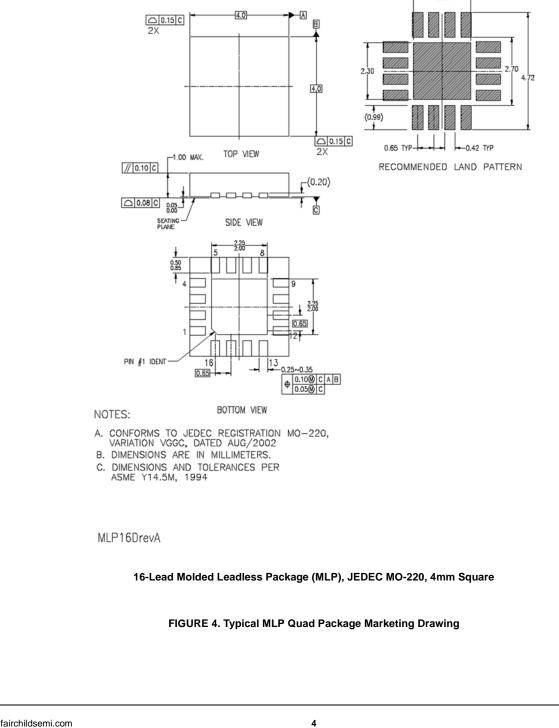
shows a typical MLP-Quad package drawing. The dimensions of the recommended land pattern are specified in the drawing.
